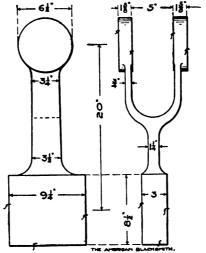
DIMENSIONED VIEWS OF FINISHED CONNECTING ROD.
